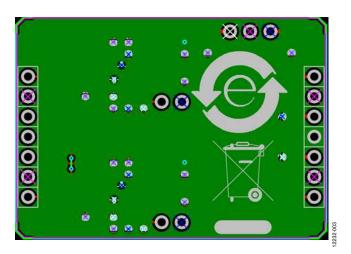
6-Lead SOT-23 ADC Driver, Solder Side
